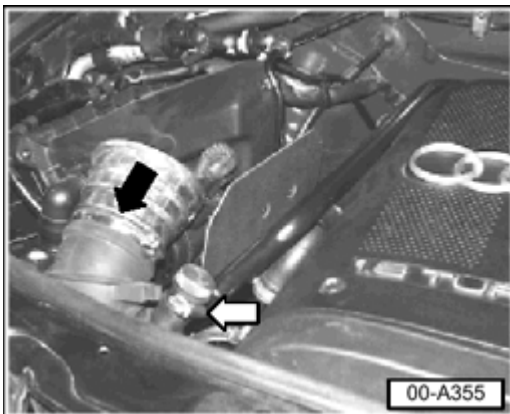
Special Tool VAG 1687/1 Pressure Adapter, Installing (1.8L Turbo)
